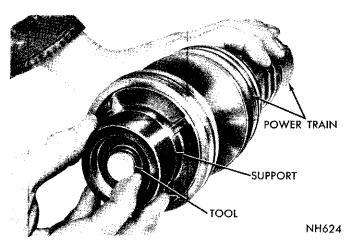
Retaining Bearing Rollers with Arbor Tool
